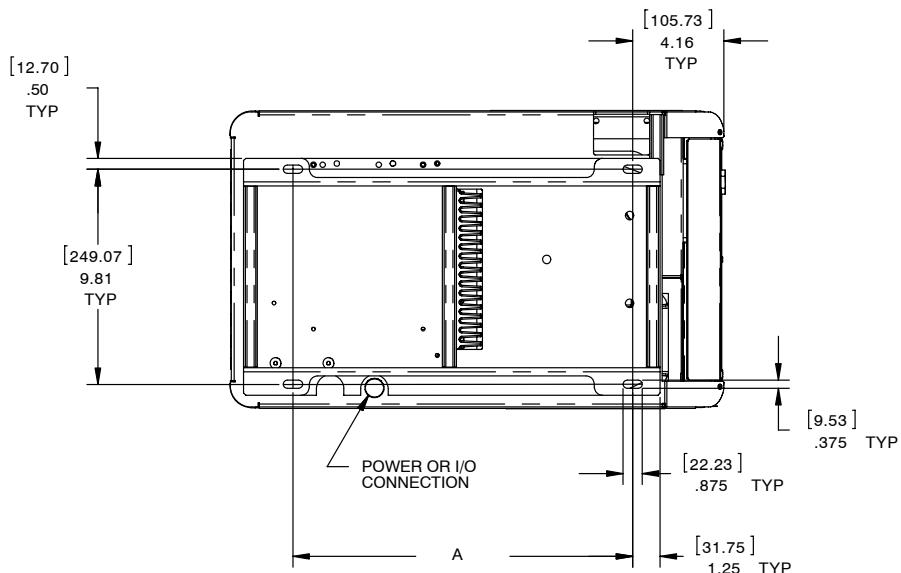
Bolt mounting pattern (refer to Table 3-2)
